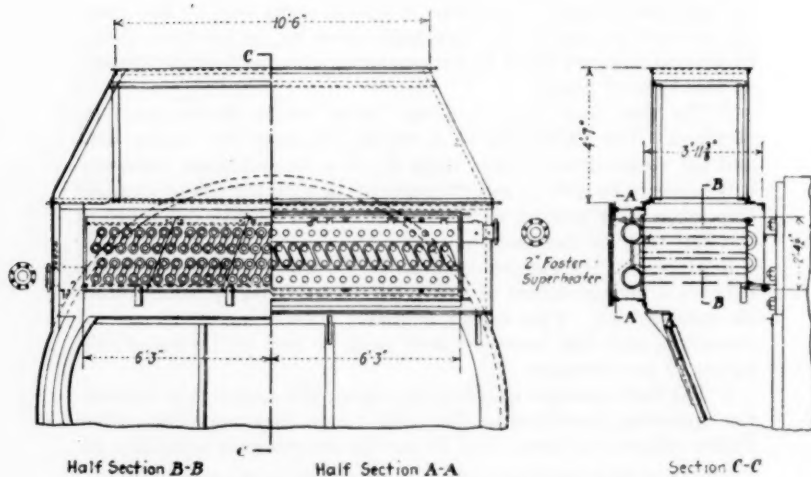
SUPERHEATER USED WITH SCOTCH MARINE BOILER TESTED
